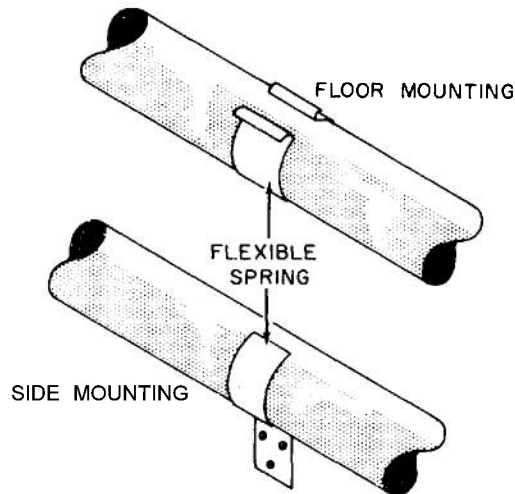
Use Spring Clamps for Frequently Removed Components
